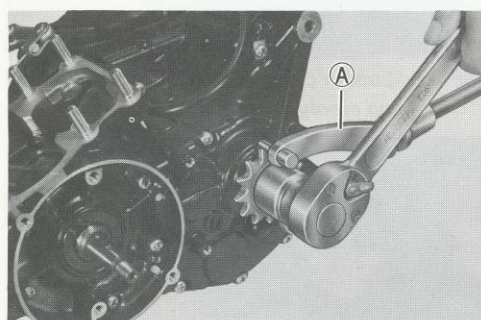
Lock sprocket with special tool (A) (09930-40113), and remove sprocket nut.
